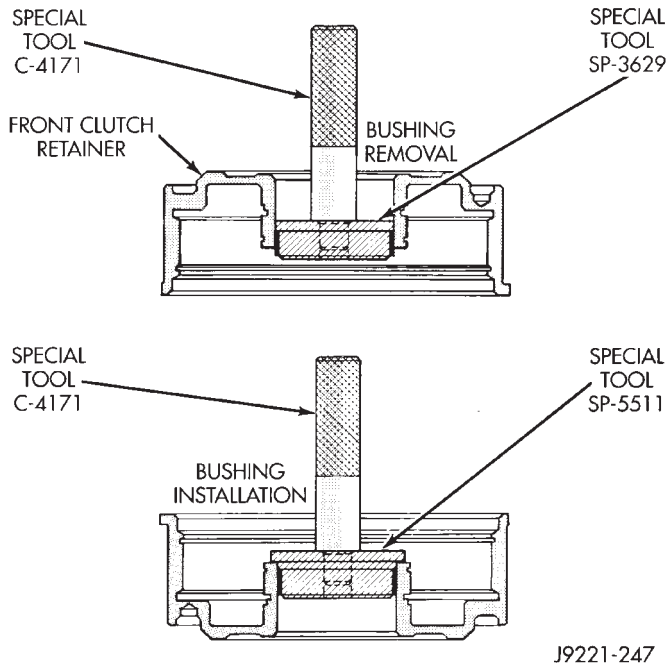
Front Clutch Retainer Bushing Replacement Tools
